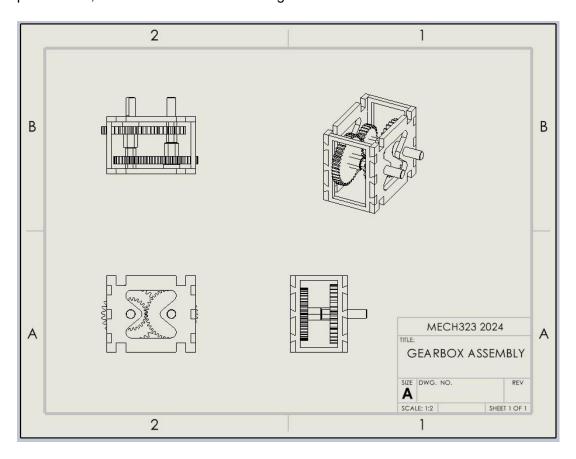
CAD drawing of the gearbox assembly from top, side, and trimetric views.
